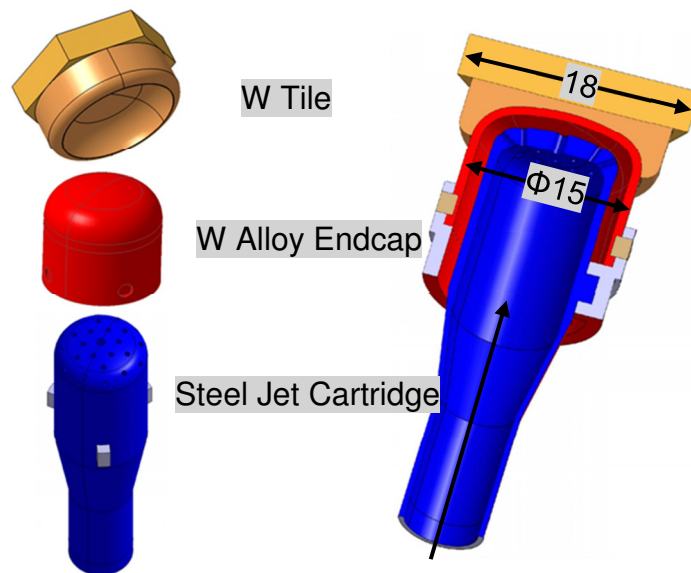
The HEMJ divertor. Exploded view (left) and cross section of assembled module (right). Dimensions in mm. [15]
